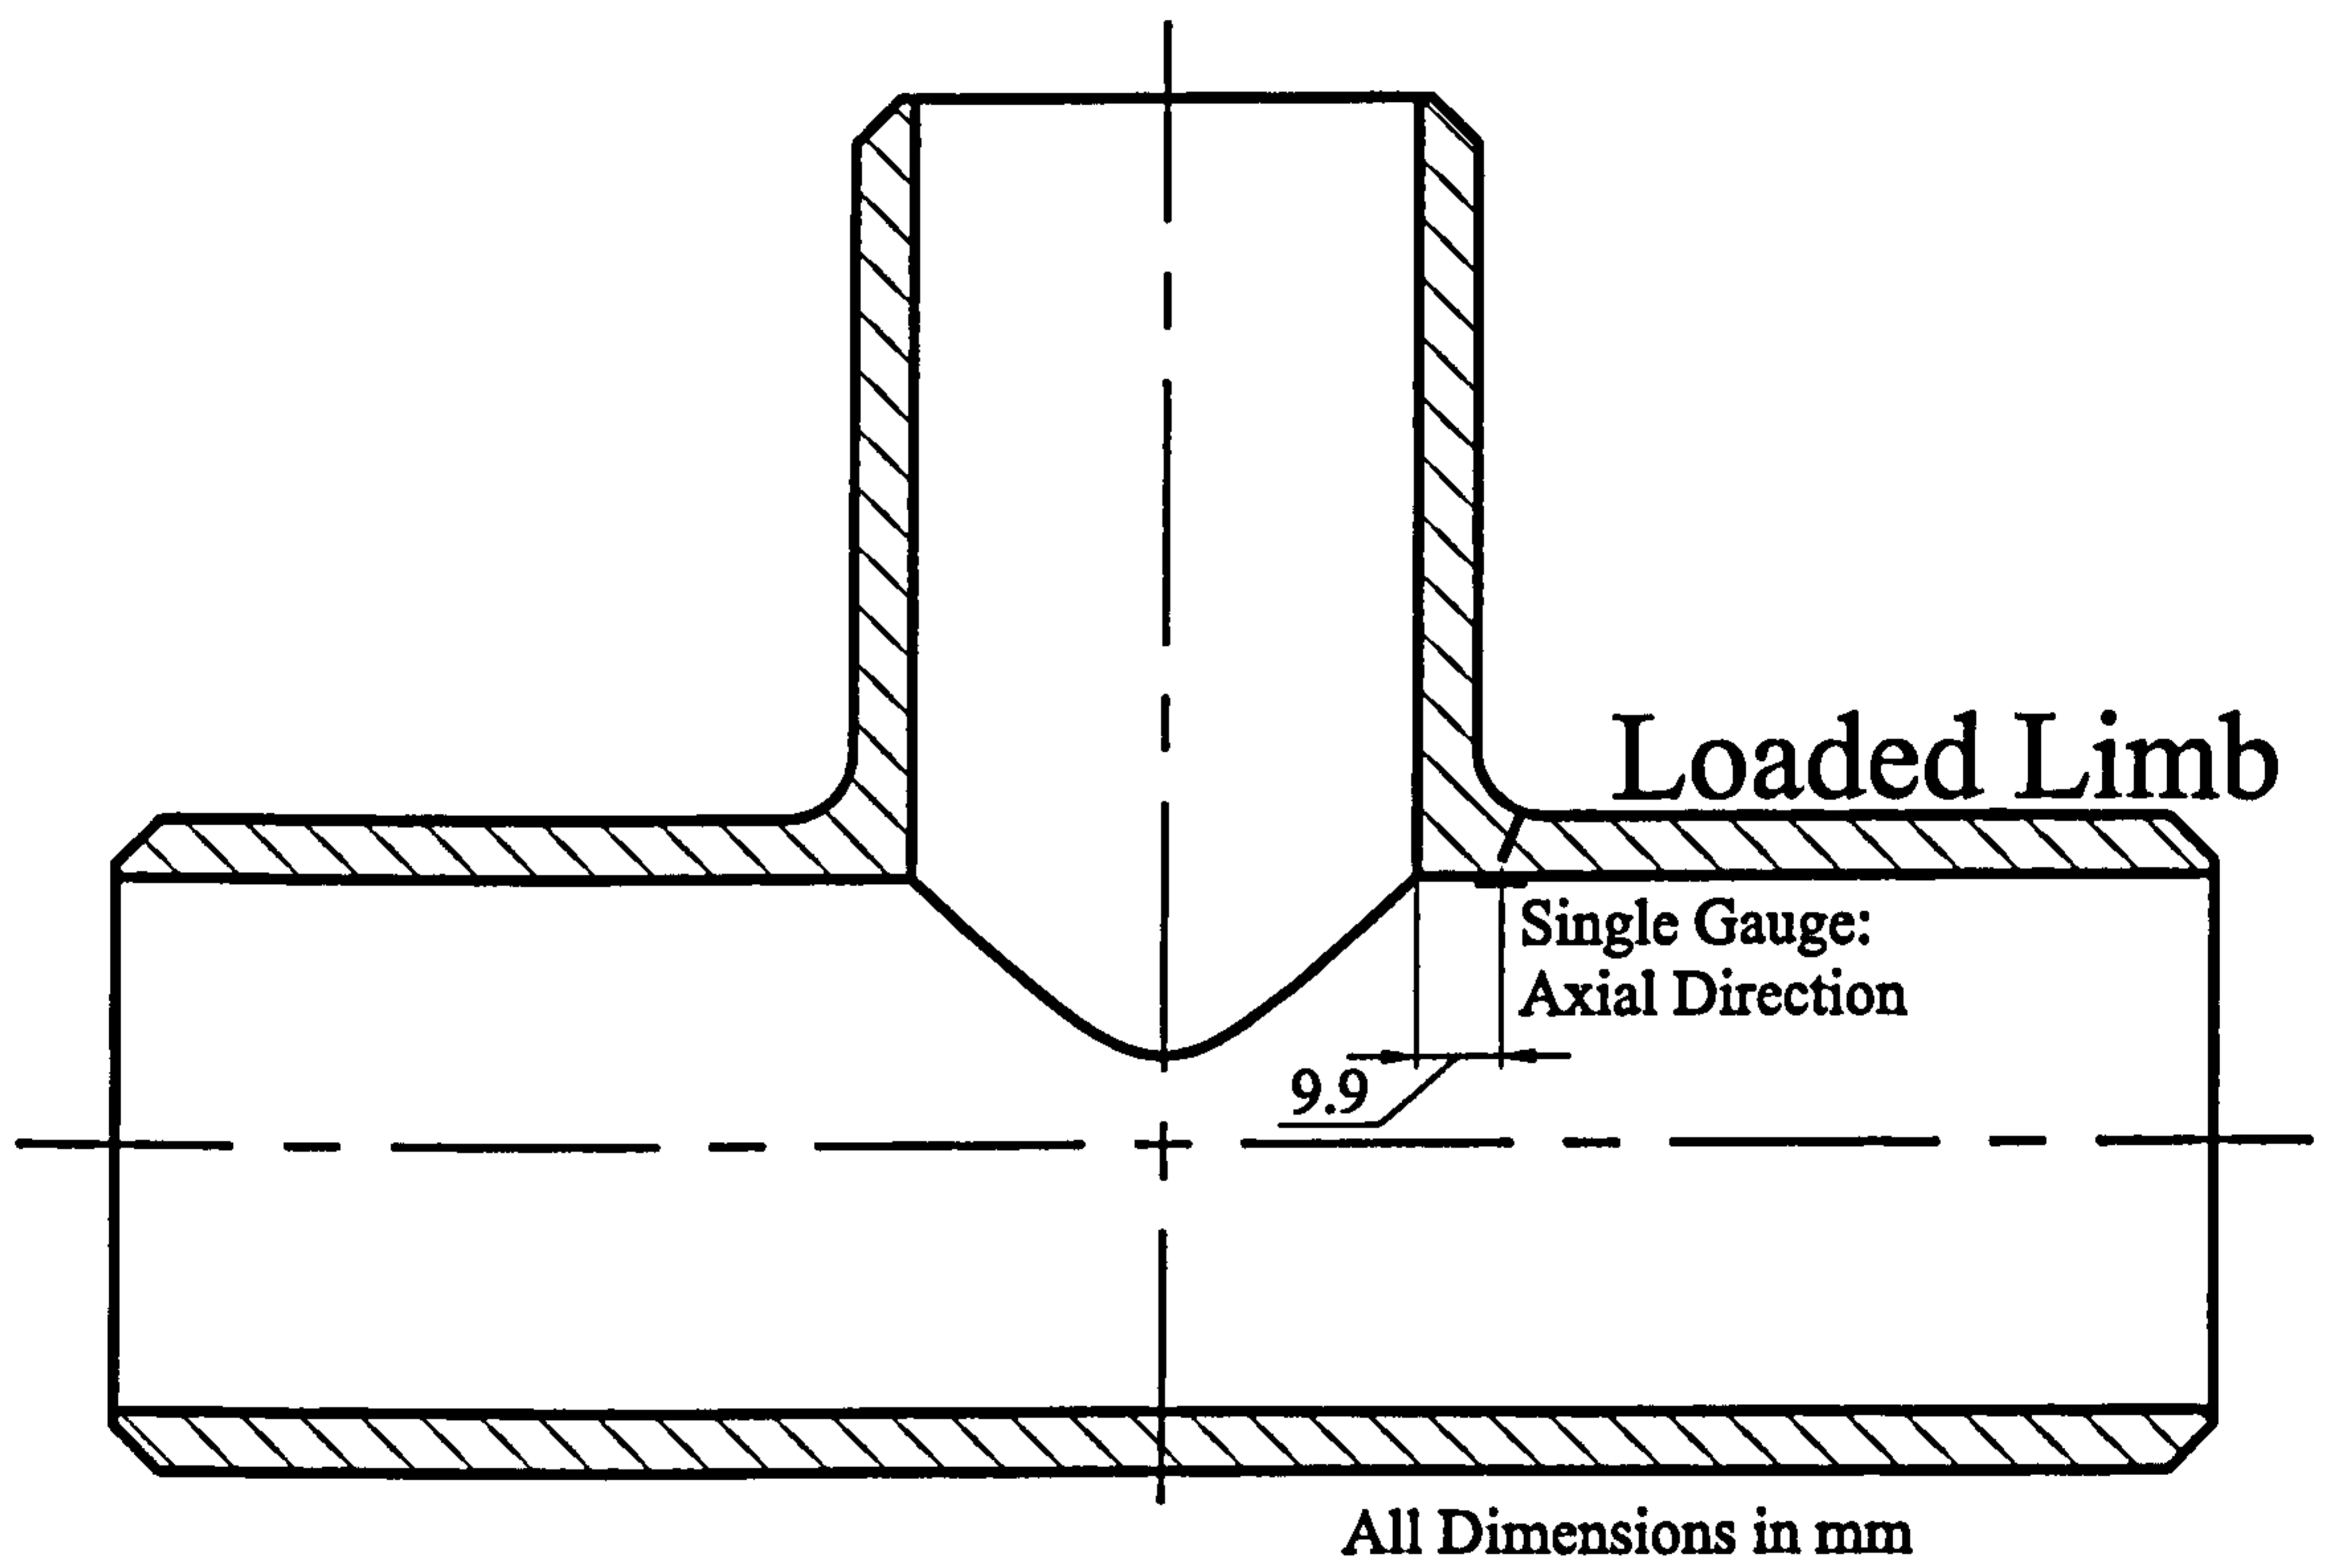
Additional Internal Gauge for Part-Penetrating In-Plane Bending
